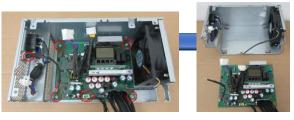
Identity PCBA > 10 cm² for further treatment (MAIN board: 160.923 cm²).
